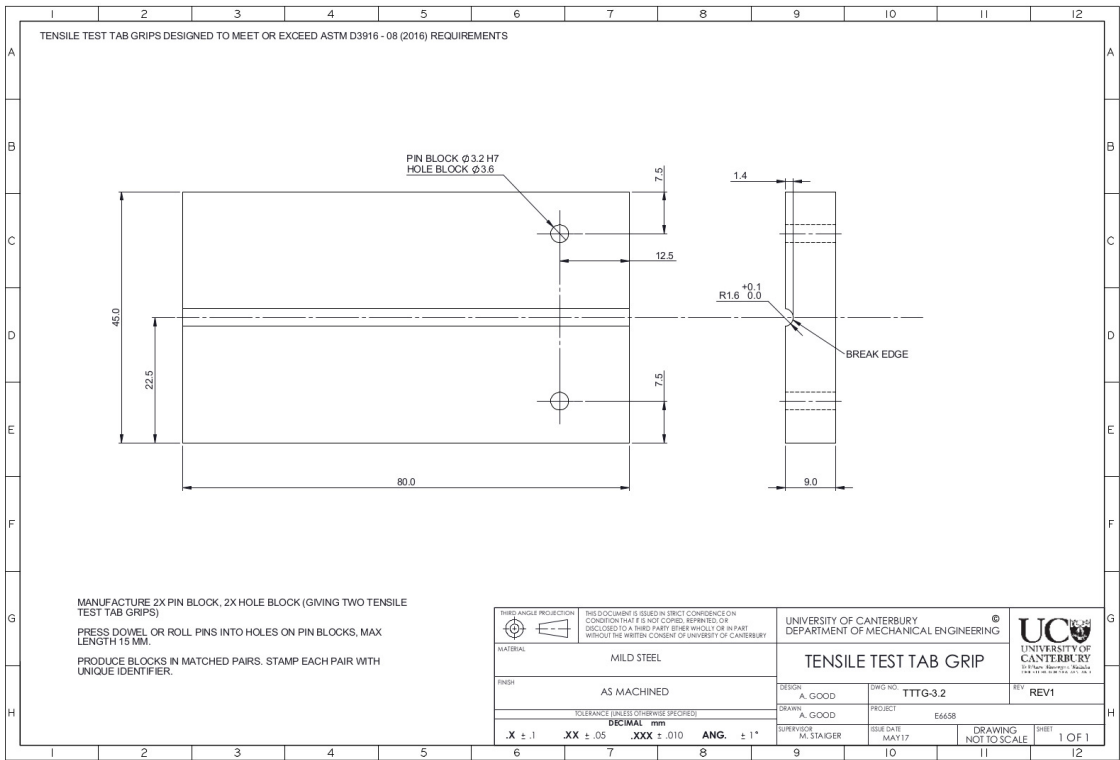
CAD drawing of tensile testing clamp fixtures used in experiments, fixtures designed to meet and exceed ASTM D3916
